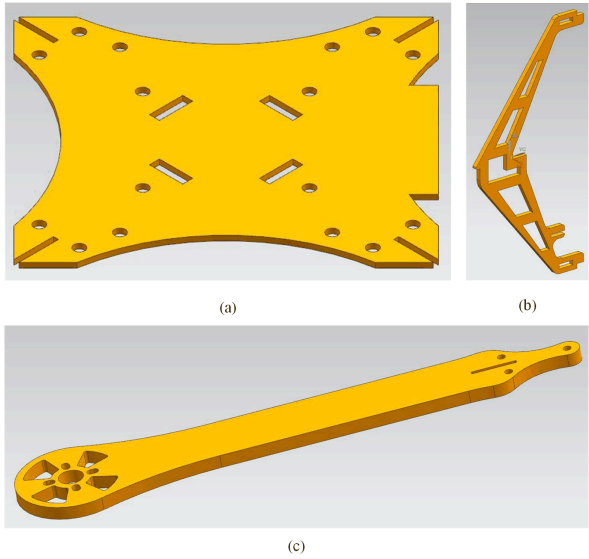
Base, supporting frame and motor boom of the optimized structure. (a) Base; (b) Supporting frame; and (c) Motor boom
